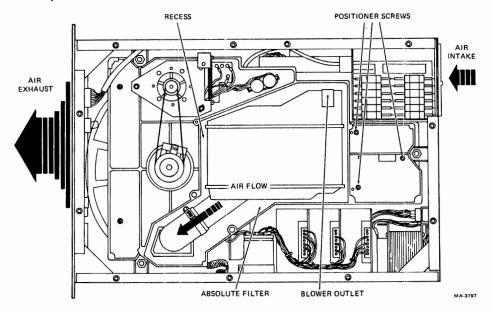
RKØ5J Disk Drive (Bottom View)
